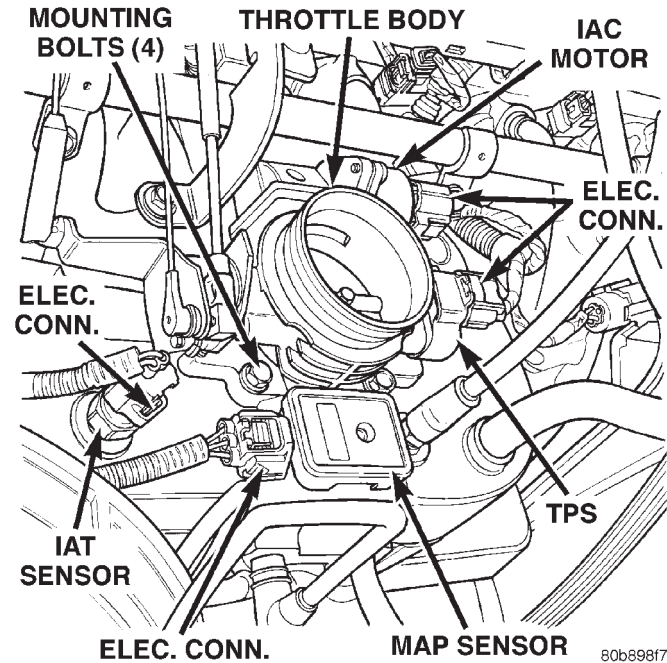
Intake Manifold Air Sensor Location—4.0L Engine
